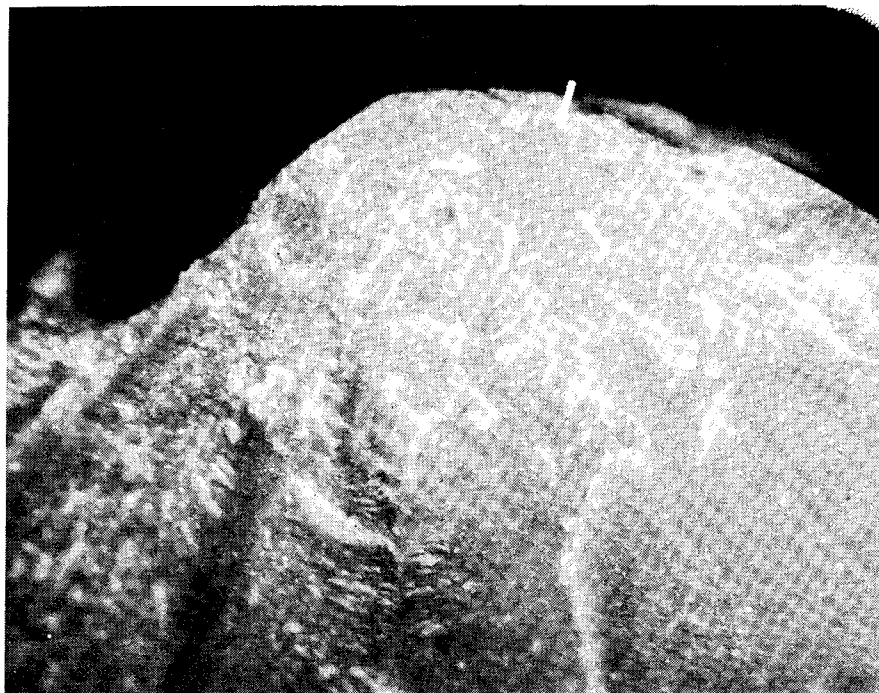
Fractography of rotating beam specimen B3 (35x)
